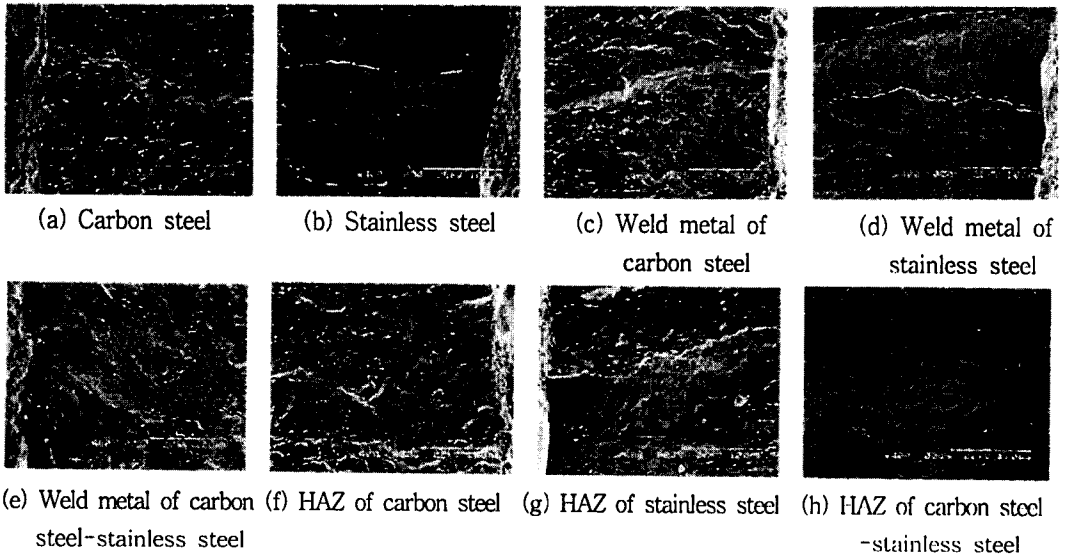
SEM Fractographs of the base metal and weld joint of bimaterial, carbon steel and stainless steel
